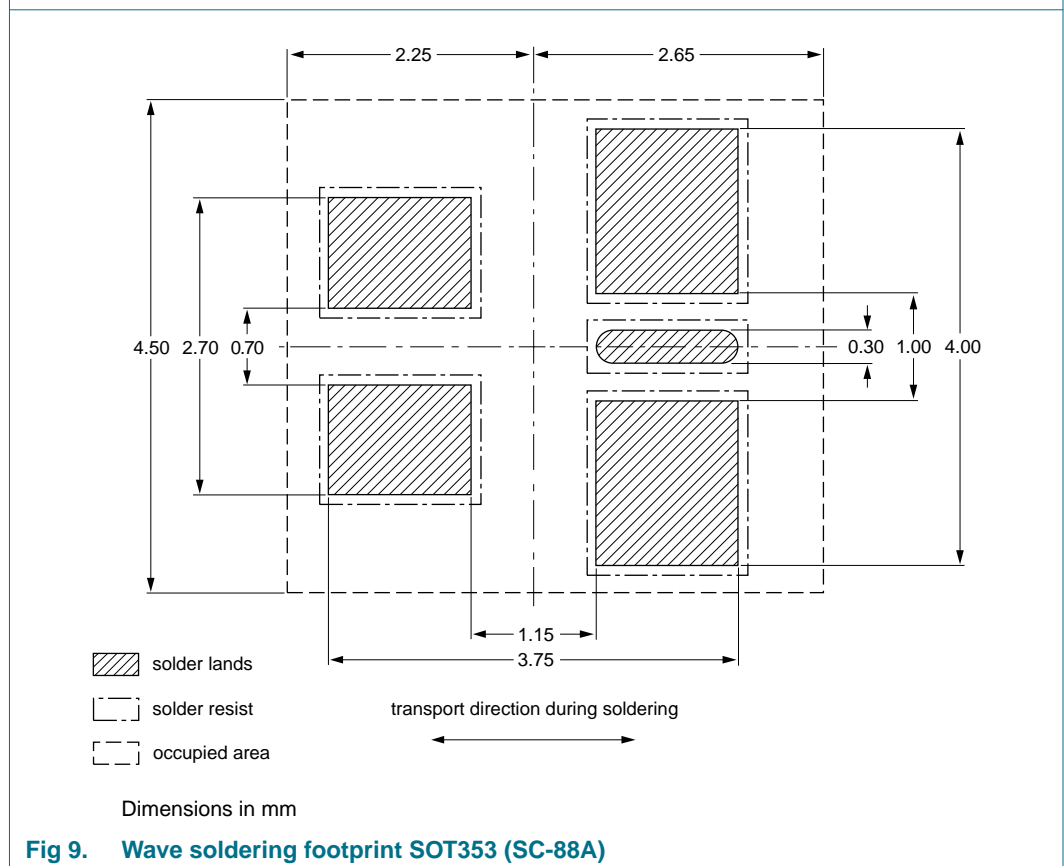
Wave soldering footprint SOT353 (SC-88A)
